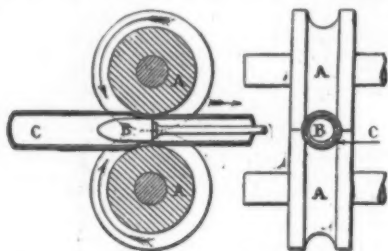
WELDING LAP-EDGED TUBES BY ROLLERS.
